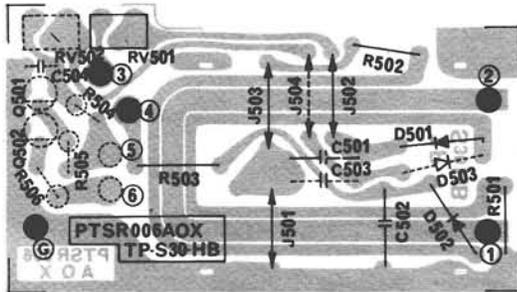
SWR Printed Circuit Board – 14T270 & 14T305
